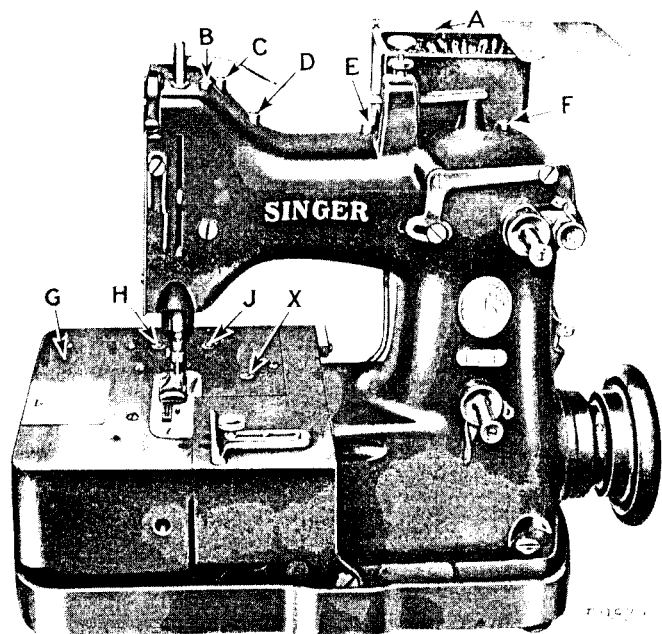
OILING POINTS AT FRONT OF MACHINE
